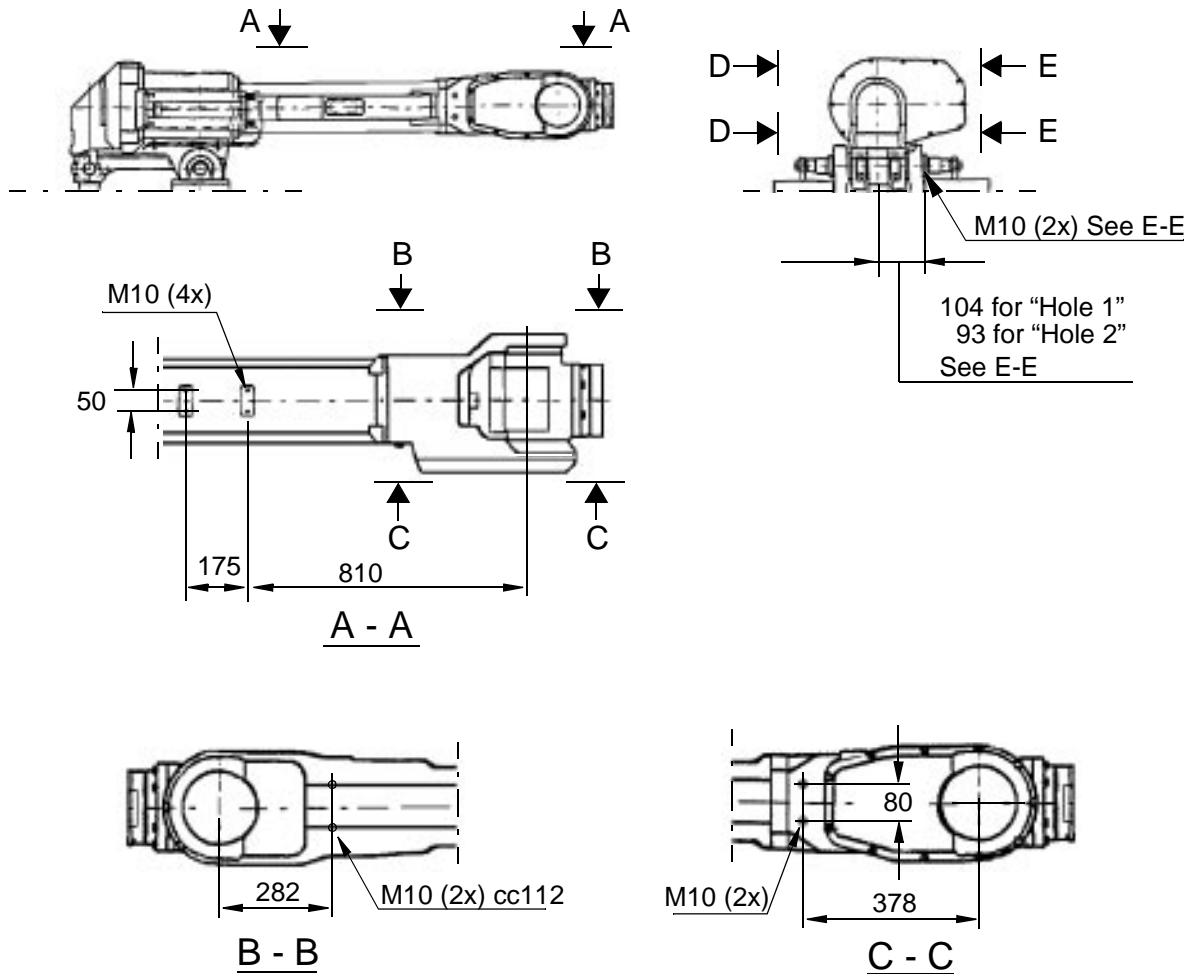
Holes for mounting extra equipment (dimensions in mm).
